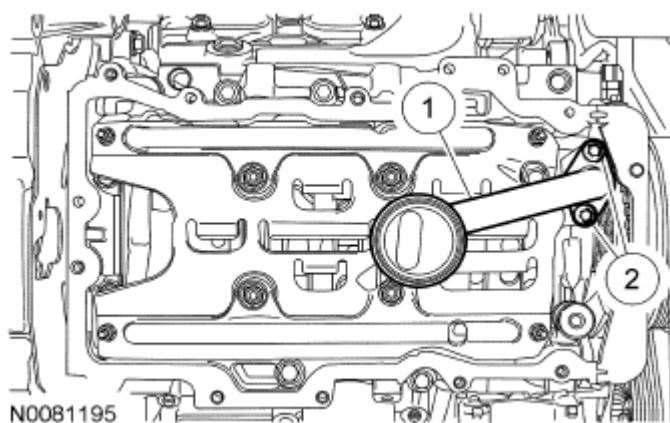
Positioning Oil Pump Screen And Pickup Tube
